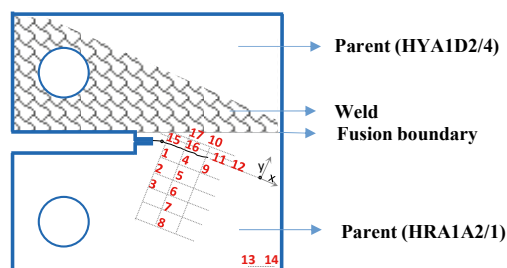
Schematic illustration of the CT specimen configuration, the crack path and measurement points.
